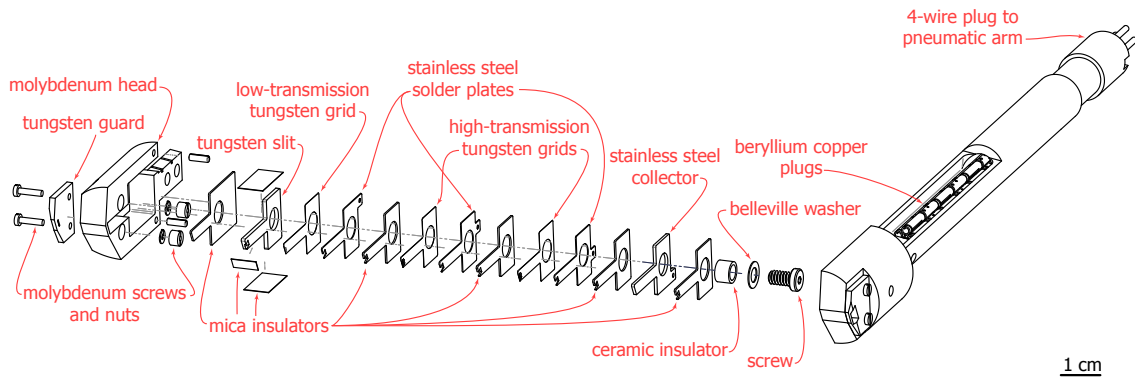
Line drawing of the retarding field analyzer probe. The "West" side is exploded while the "East" side remains assembled. Pictured is the stack assembly of electrodes and insulators which is held in the molybdenum probe head with a screw. The tungsten guard plate, held on with molybdenum nuts and bolts, protects the internal components. The electrodes are attached with wires (not pictured) to the beryllium copper plugs. The scanning probe system allows for only 4 independent electrodes, whereas the retarding field analyzer probe head has two distinct analyzers (each with 4 electrodes); the plugs allow for flexible operation of which electrodes are connected. The boron nitride sleeve is removed for clarity.
